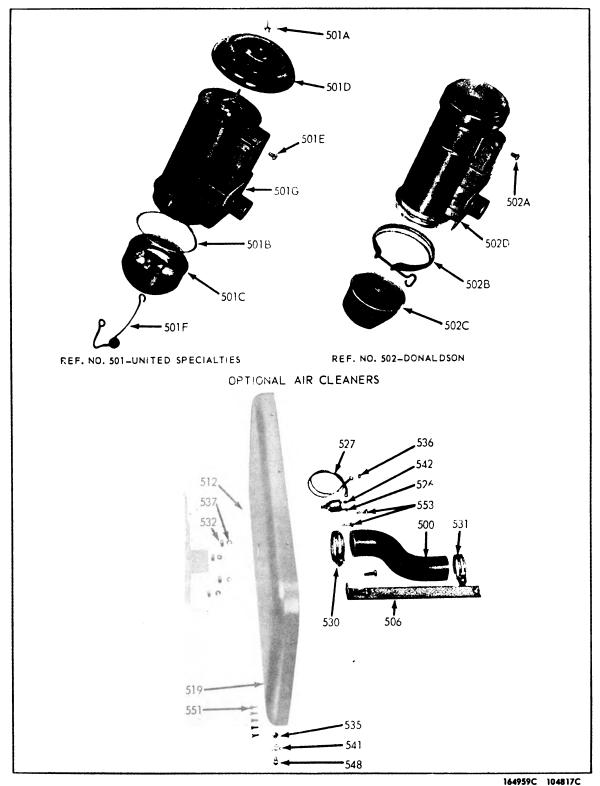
, END PANEL AND AIR CLEANER FOR ENGINE HOUSE WITH UNDERSLUNG FUEL TANK
